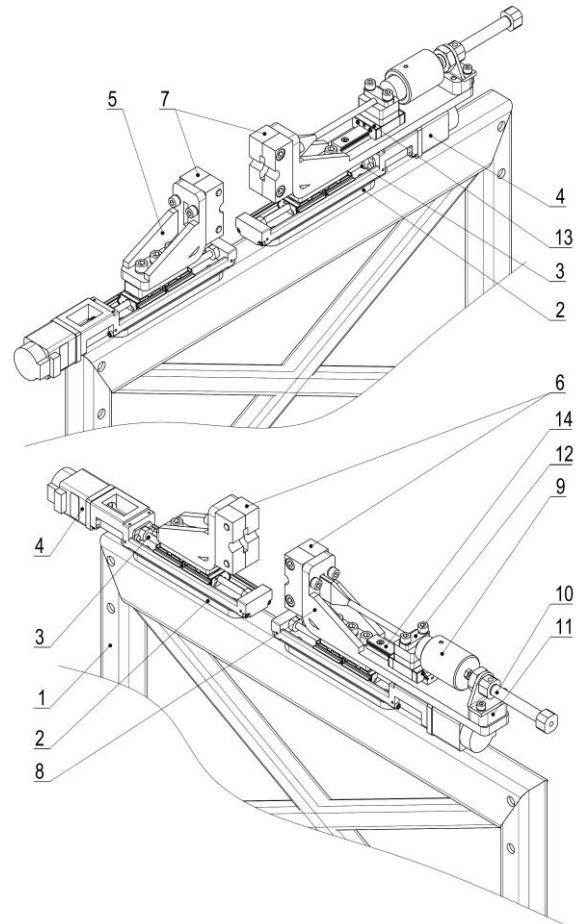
Welding table: 1 – frame, 2 – base plate of translational movement drive, 3 – translational die movement drive system, 4 – stepper motor, 5 – left-hand die bracket, 6 – cutter die, 7 – guide die, 8 – right-hand die bracket, 9 – heater, 10 – air cylinder, 11 – air cylinder yoke, 12 – heater yoke, 13 – heater translation guide carrier, 14 – profiled rail of the heater translation guide
